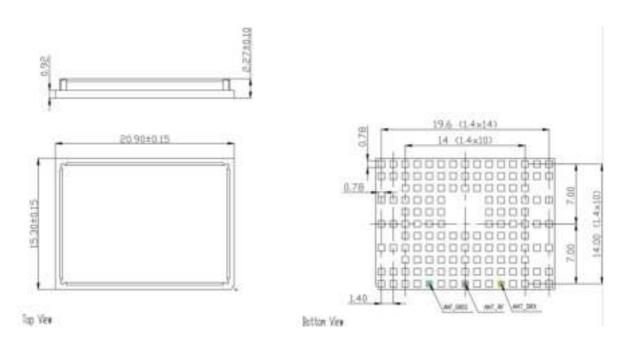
Dimensions of TX82-W, TX62-W-B and TX62-W-C (all dimensions in mm)
